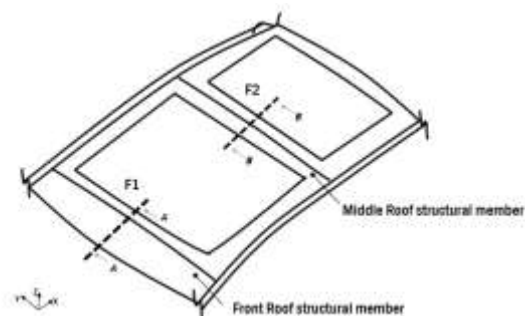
Cross-sectional force measuring locations (F1 & F2) for Roof system
